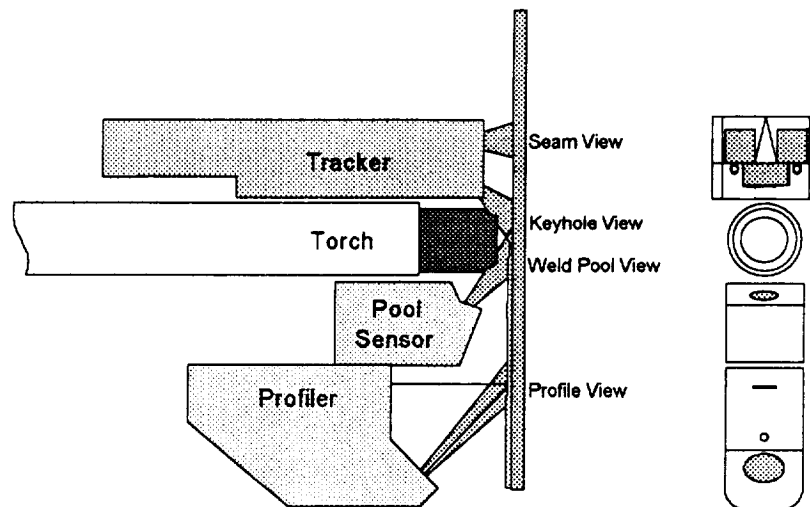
Illustration of sensor suite, mounted about the welding torch
